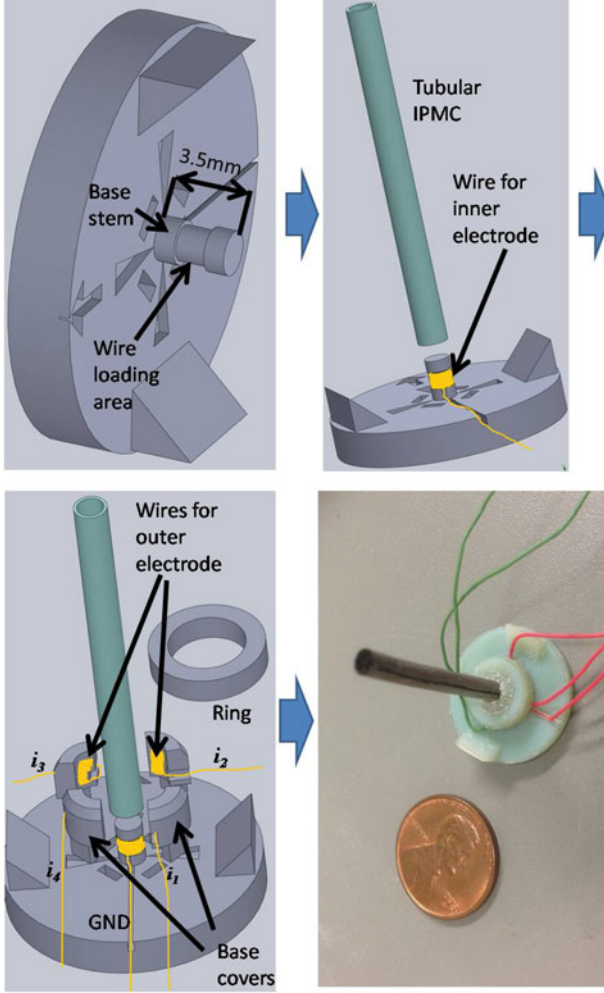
Packaging and wiring scheme of a tube IPMC sensor.
